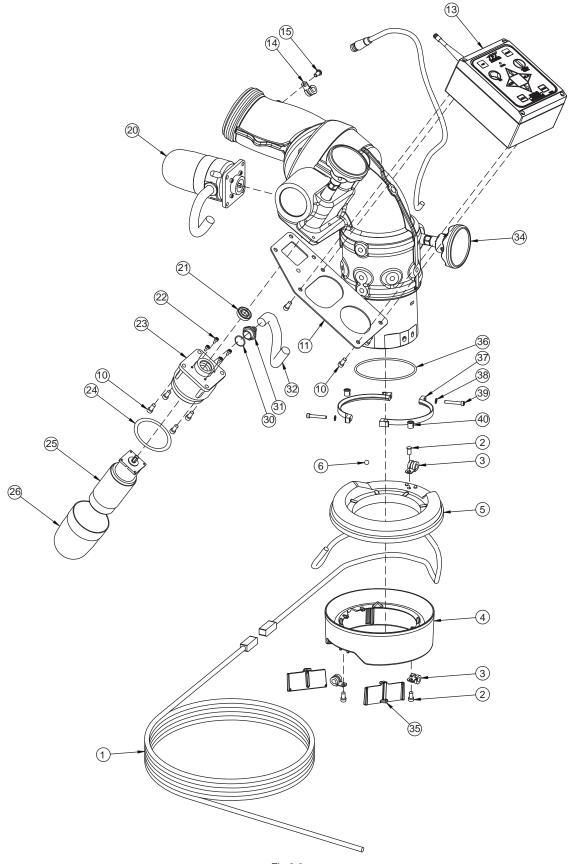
Monsoon RC Exploded View of Electrical Parts
